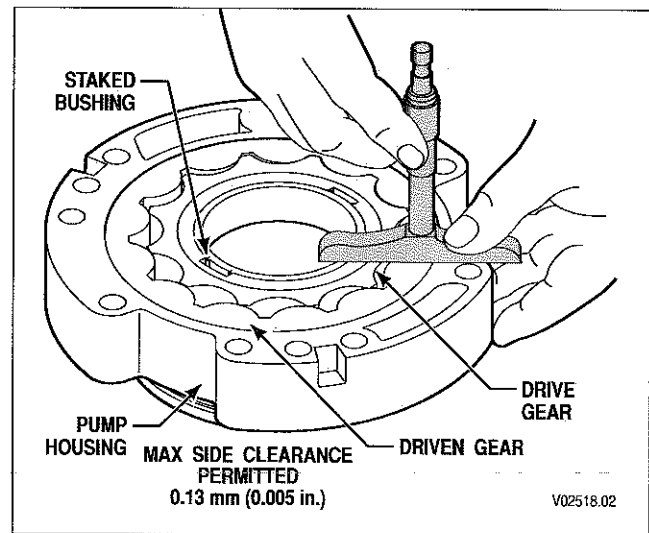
Measuring Gear Side Clearance In The Pump Housing
